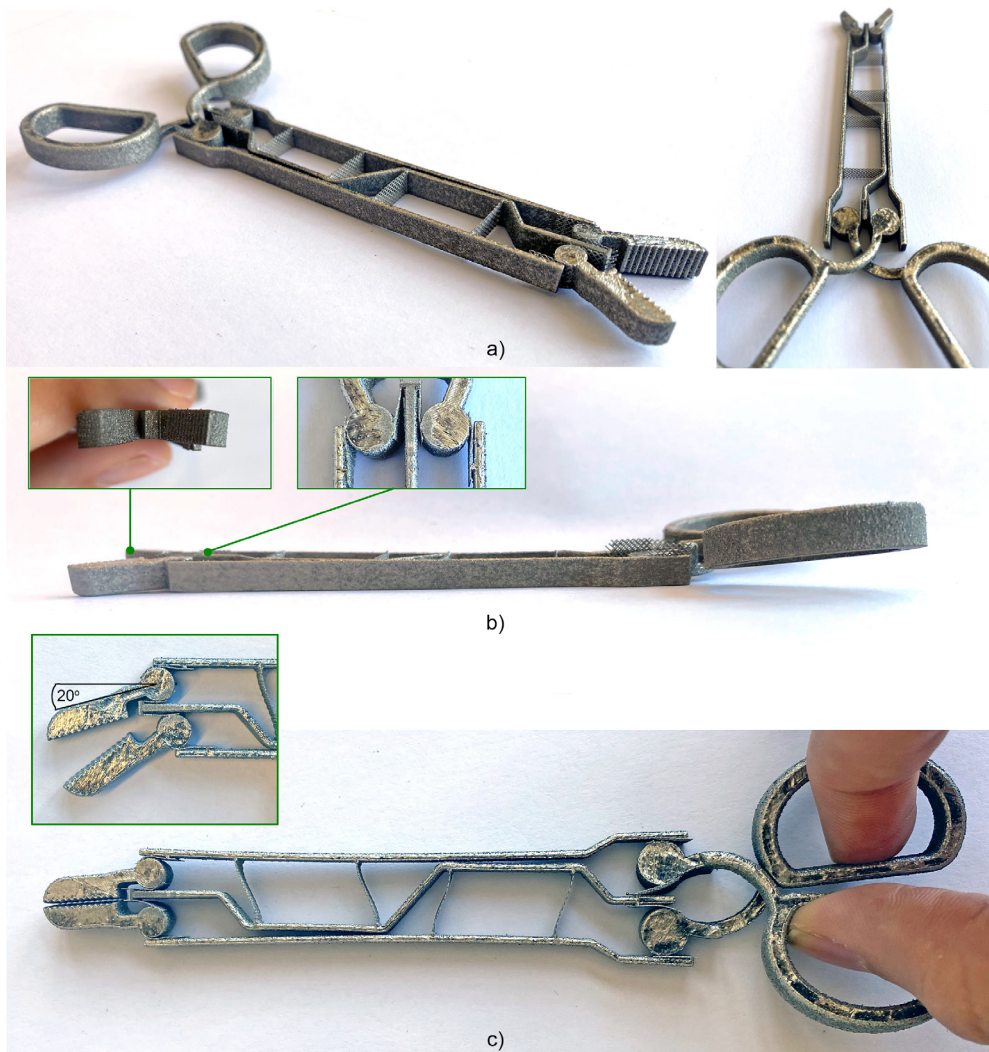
Second iteration of the 3D printed prototype. a) 3D printed prototype. b) Side view of the prototype, showing clear warpage in the handle, and close ups of the warpage in the grasper as well as the torsion in the flexures. c) Closing of the grasper was possible with this prototype, although deformation of the outer rods is visible. The grasper was able to bend 20°.
